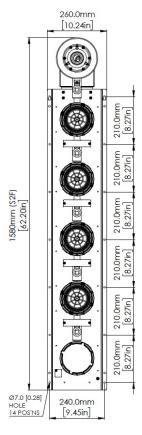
Mounting Detail and Dimensions for D1x Alarm Bar
